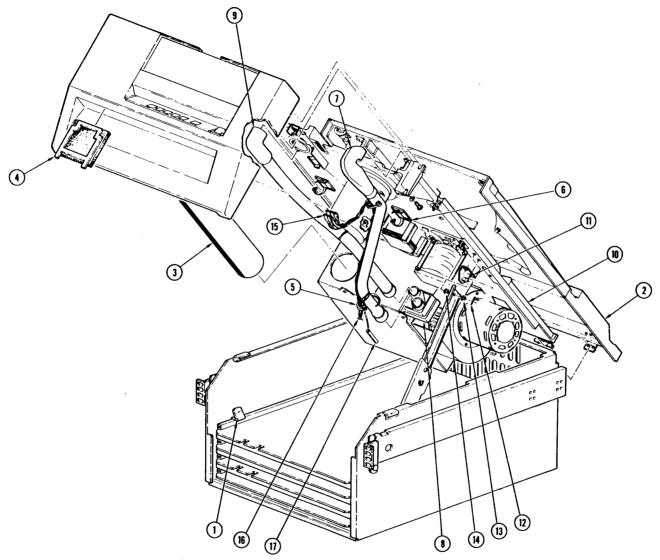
Model M990 Magnetic Tape Streamer Unit (Exploded View)
